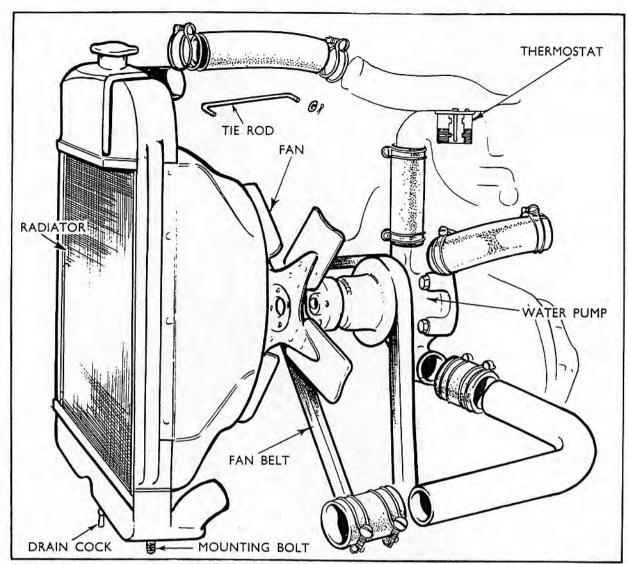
THE COOLING SYSTEM (3-A-152 Diesel Engine).
